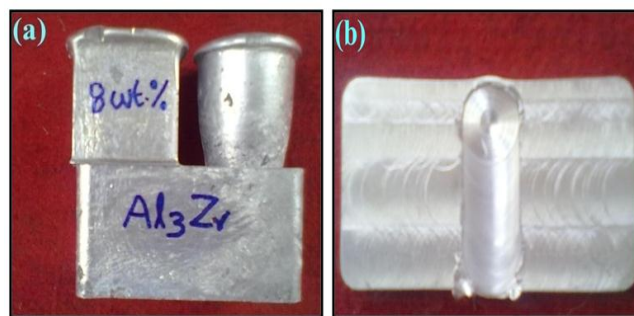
Photograph of (a) AA6061/8 wt.% Al_3Zr casting and (b) friction stir processed plate.
